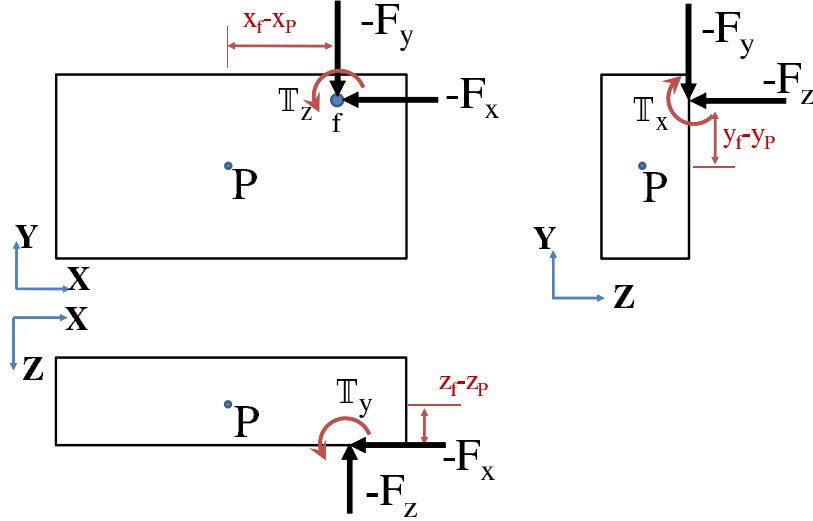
Isometric views of workpiece-baseplate assembly under load
